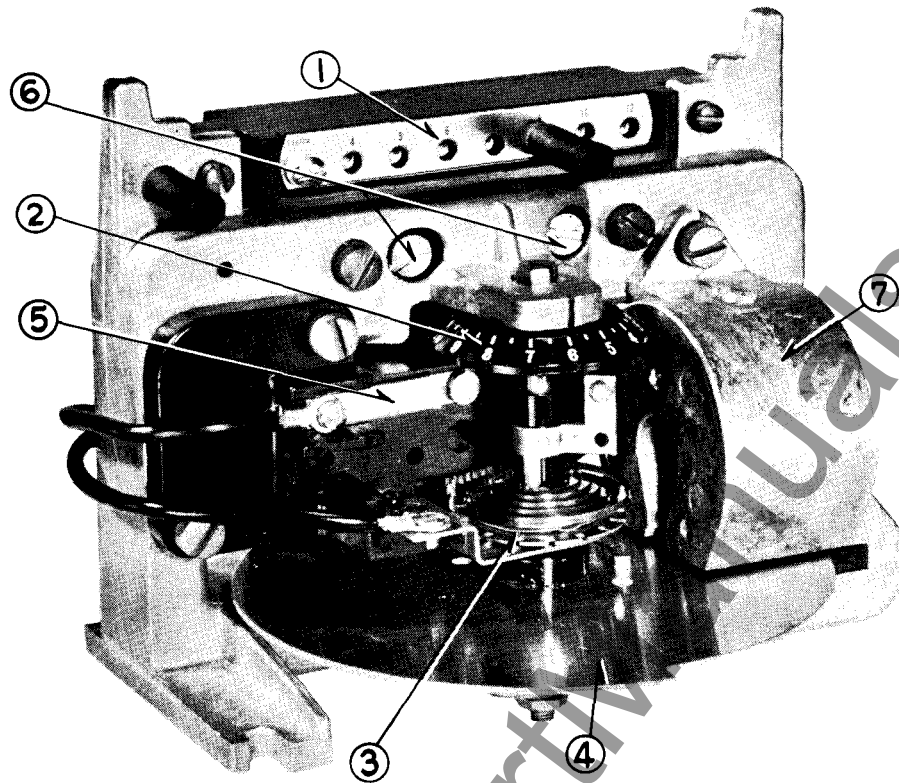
Time Overcurrent Unit (Front View). 1-Tap Block. 2-Time Dial. 3-Control Spring Assembly. 4-Disc. 5-Stationary Contact Assembly. 6-Magnetic Plugs. 7-Permanent Magnet.
